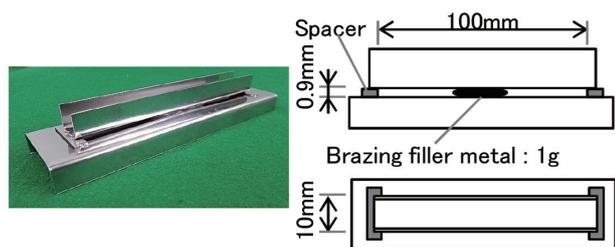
Appearance and elevation and plan views of test pieces for gap filling test
